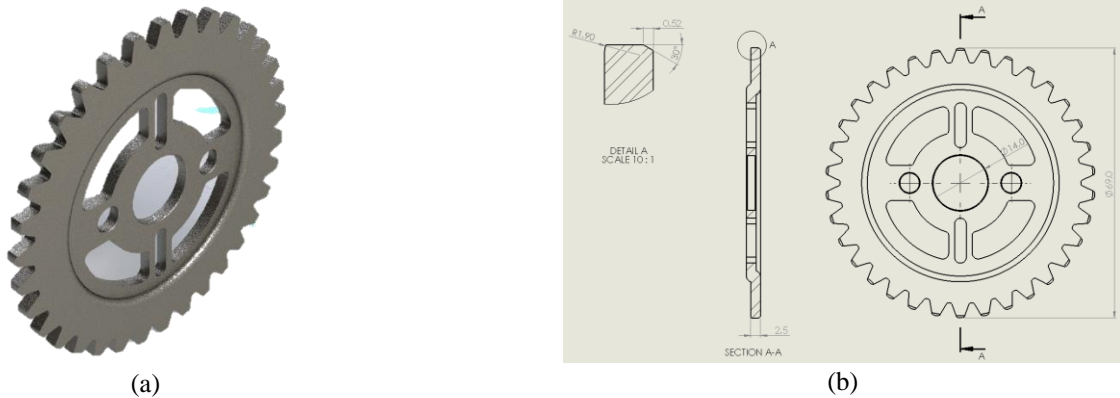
KN-00XX series sprocket-cam (a) Product Illustration and (b) Product Dimensions
